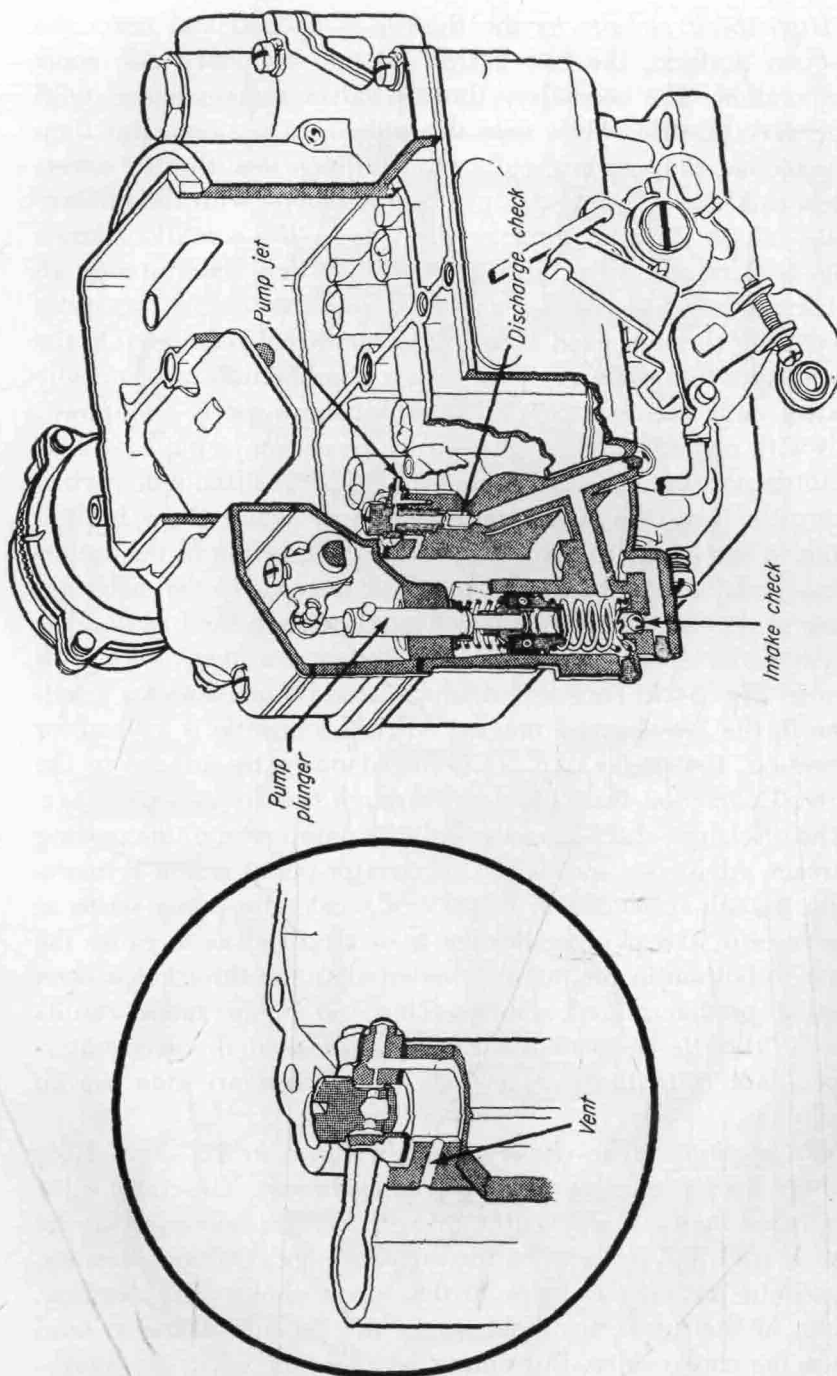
Accelerator-pump circuit of four-barrel carburetor. The pump discharges into the two barrels on the primary side only. (Oldsmobile Division of General Motors Corporation)
